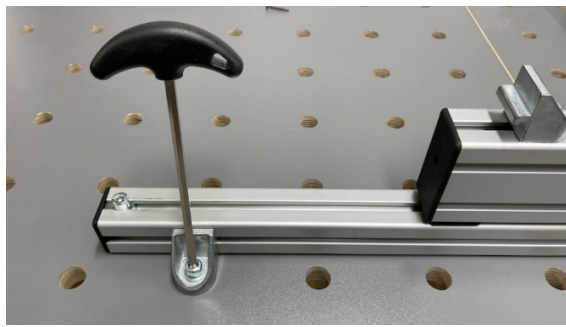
Longitudinal rail with support mounted on the hole matrix board
